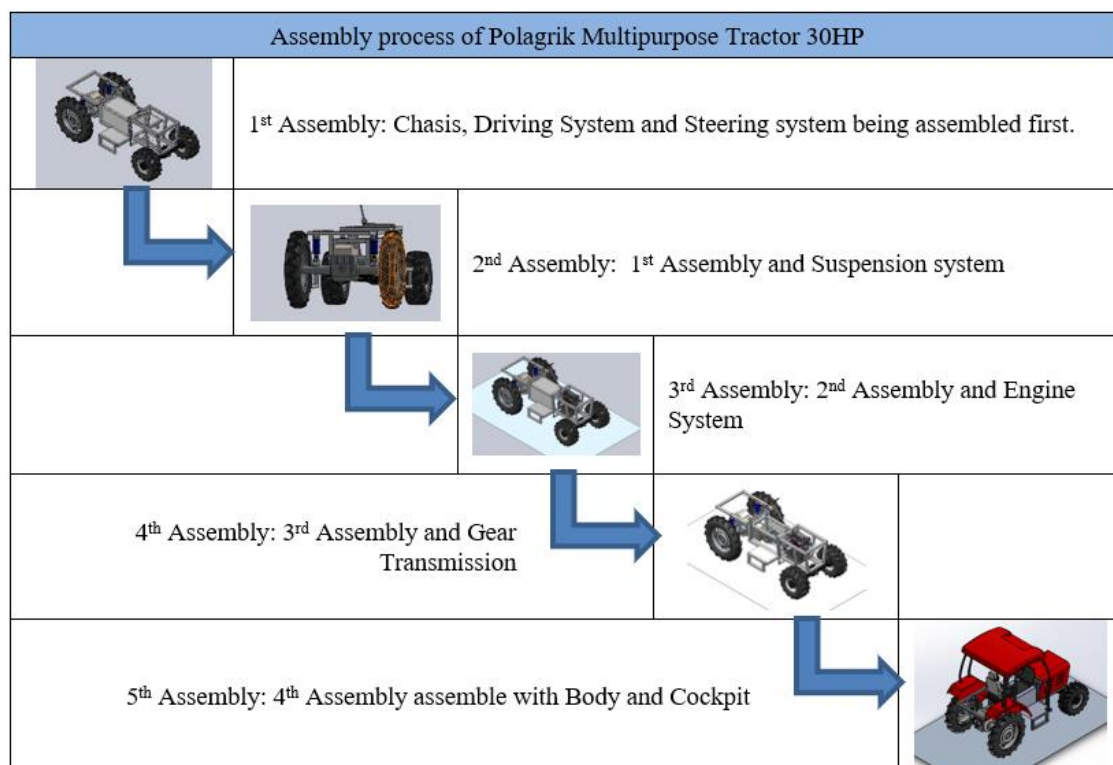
Assembly of the polagrik multipurpose tractor 30 HP
